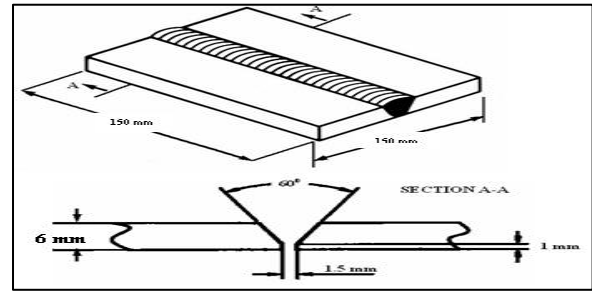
Typical weld coupon design and test plate assembly.
